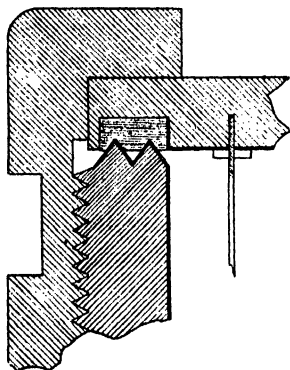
Section of edge of bomb (actual size). Showing double ridge pressed against gold washer.
